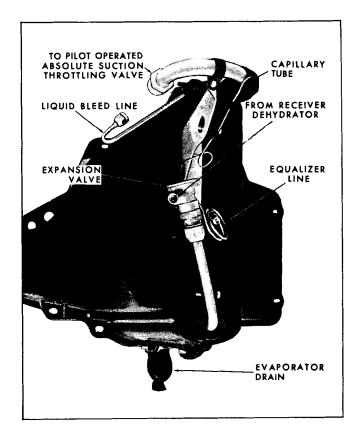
A-20 Typical Evaporator Core and Case Assembly
